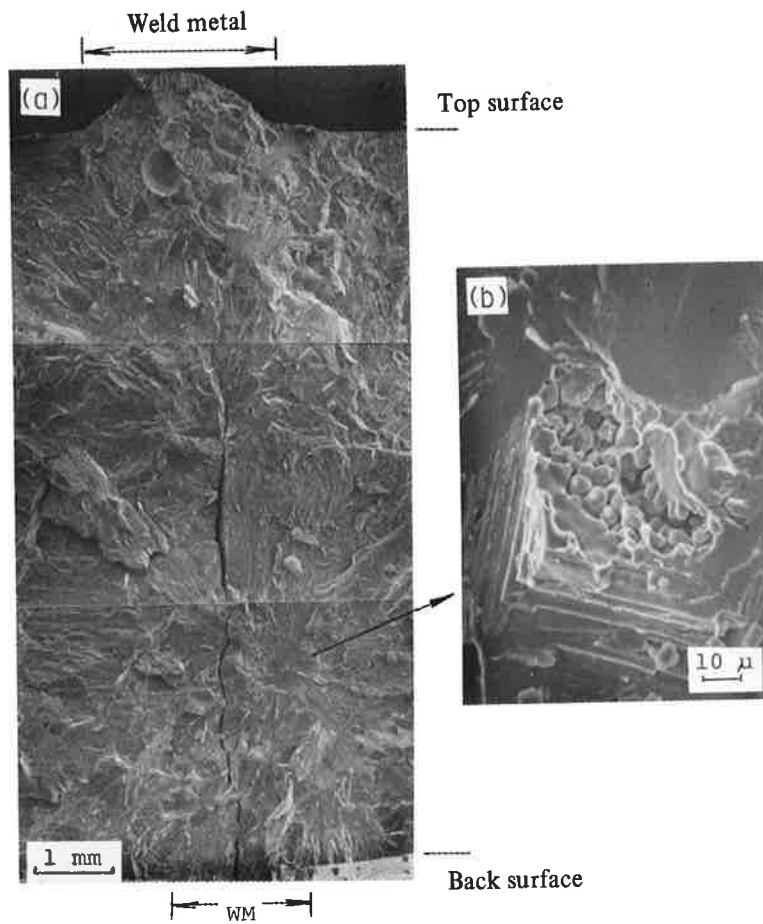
(a) Fracture surface of transverse crack and (b) its fracture origin
